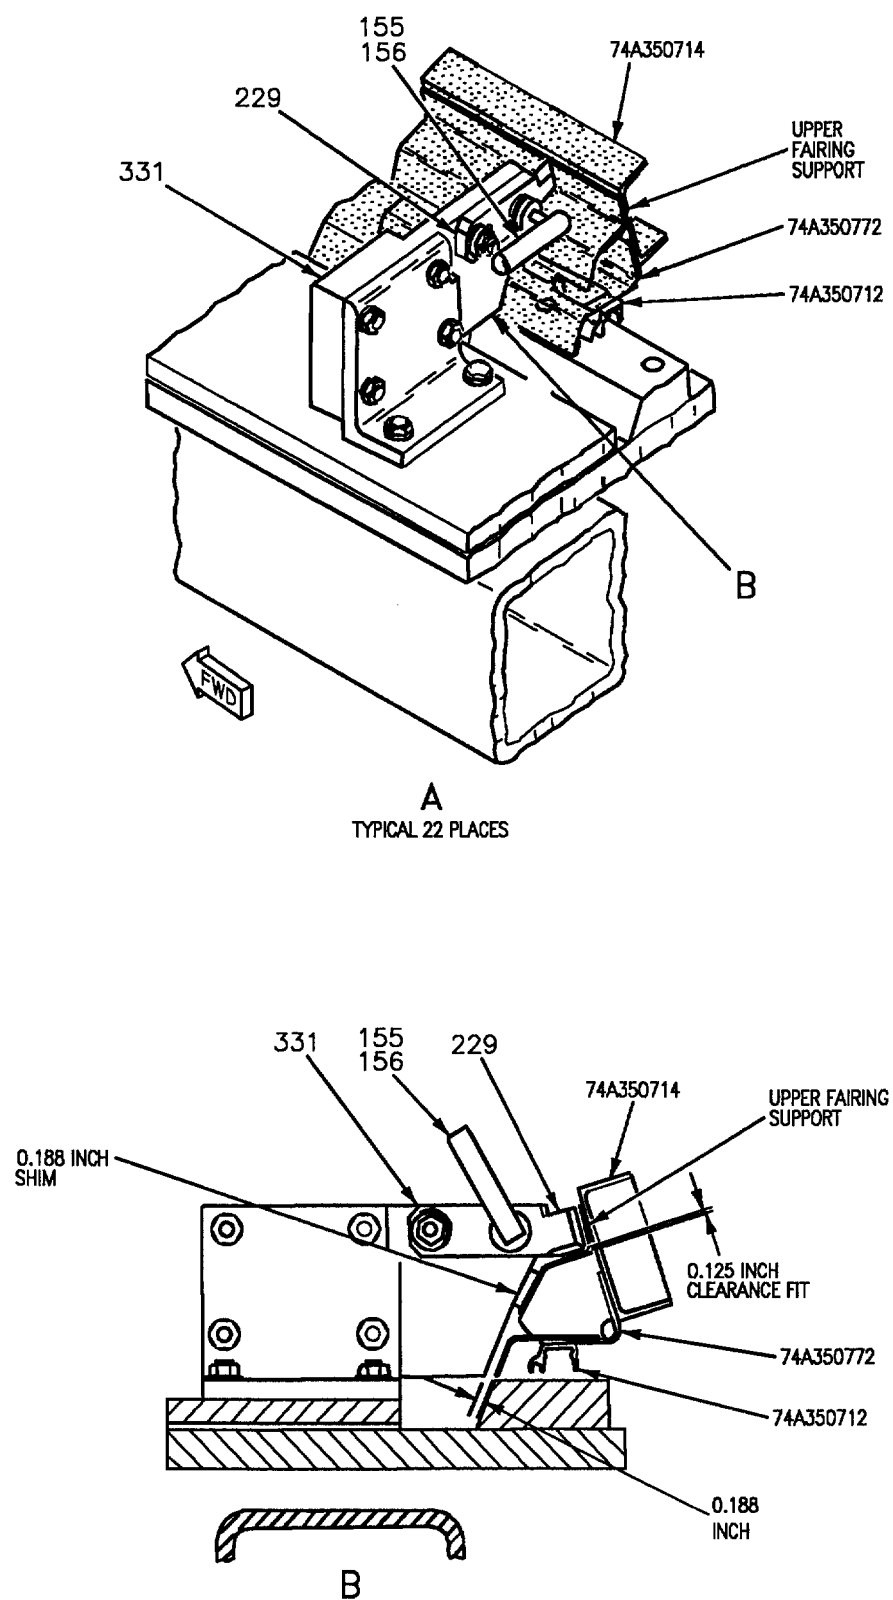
Inspection or Replacement - Upper Fairing Support (Sheet 2)
